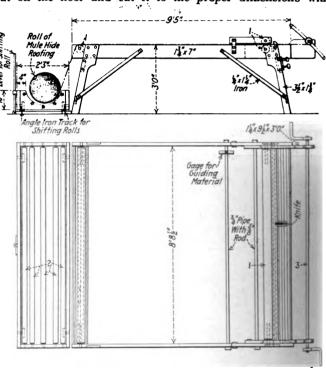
This Drawing Shows How the Roofing is Run Through the Machine
